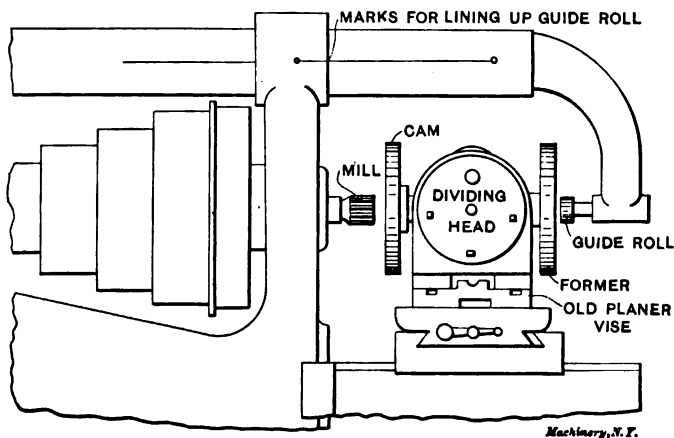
Inexpensive Fixture for Milling Plate Cams to Match a Former
